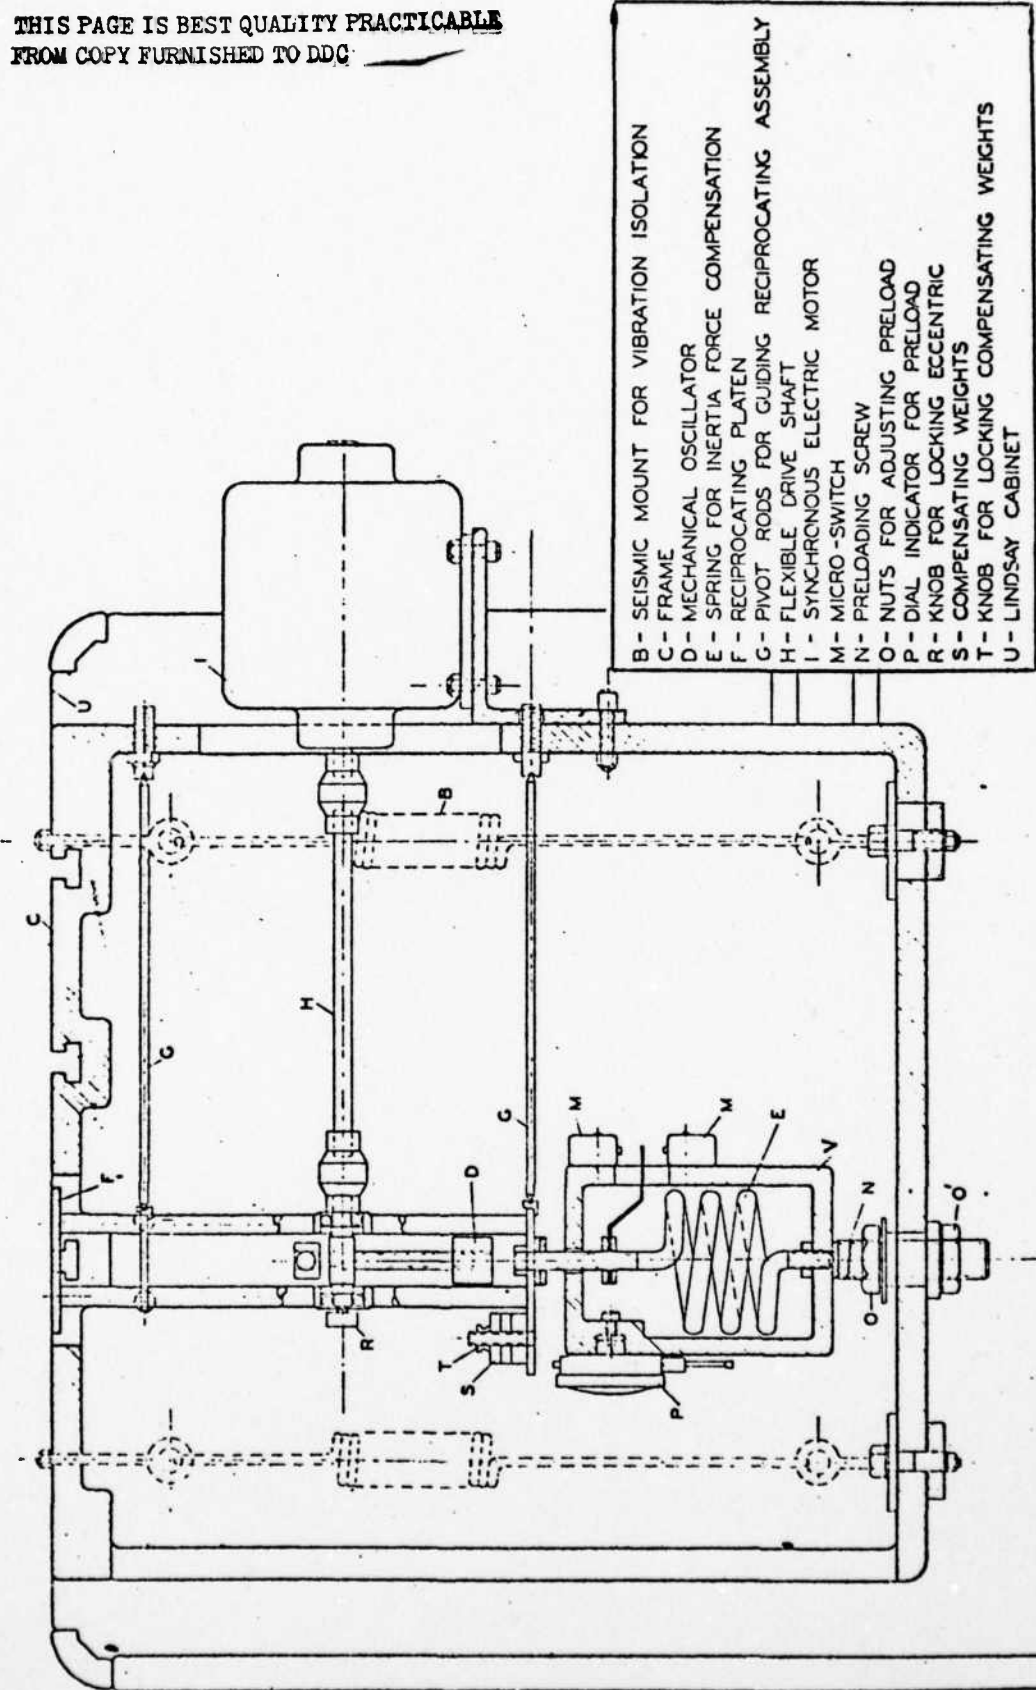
Schematic of Sonntag Universal Fatigue Testing Machine
